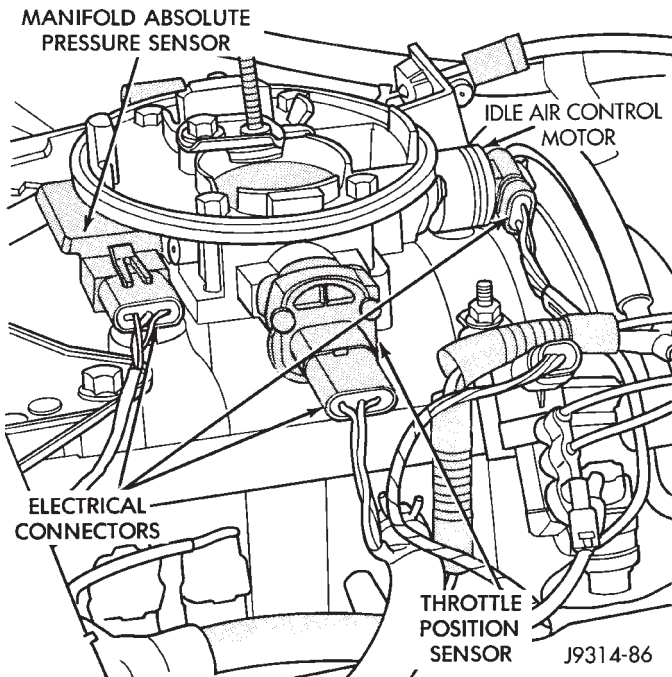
Throttle Position Sensor and IAC Motor—Typical
